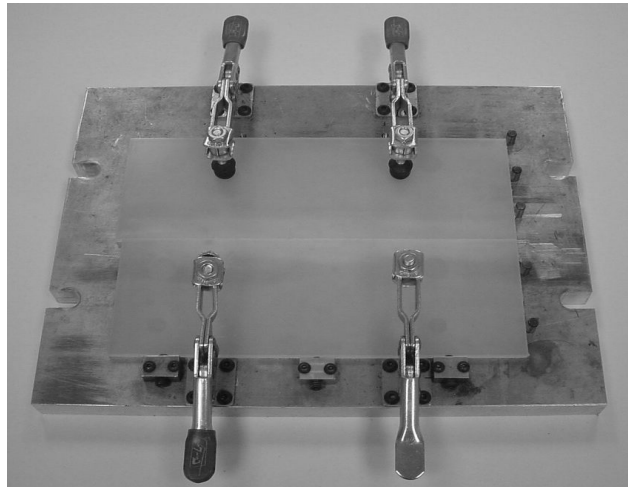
Anvil with PP sheets clamped for welding.
